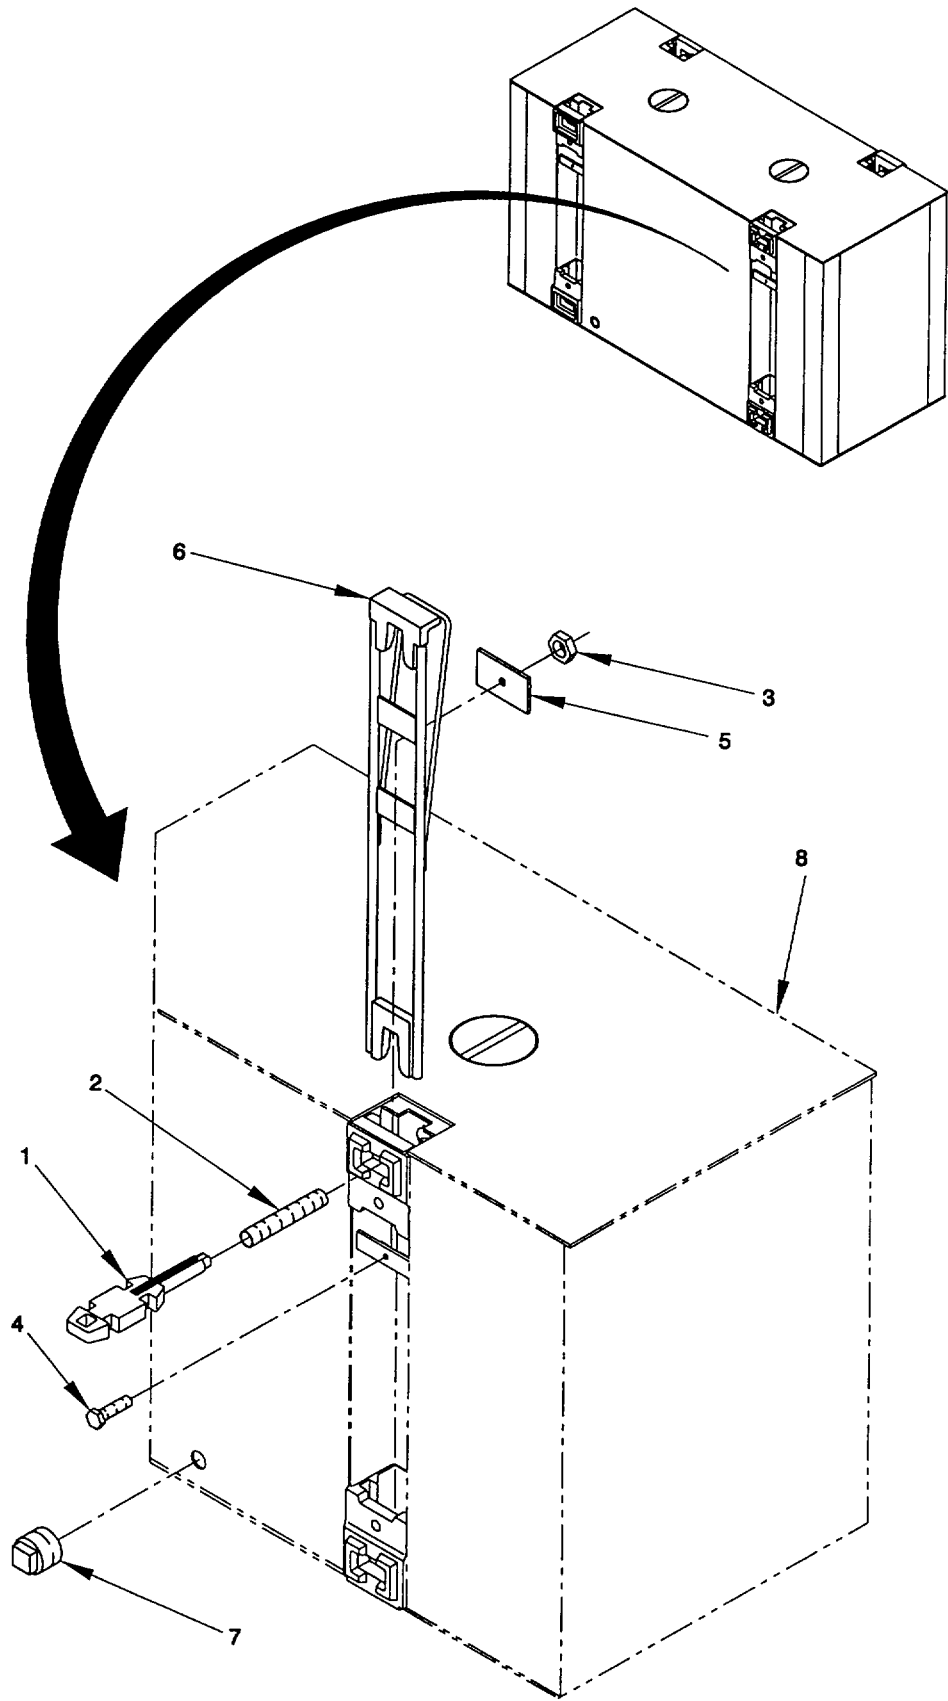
P3 Adaptor Assembly, Service/Repair.
